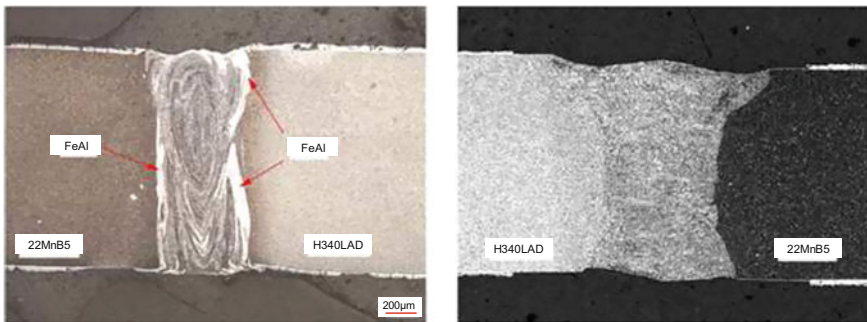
Comparison of direct welded (left) and laser ablated and then welded blanks (right)
